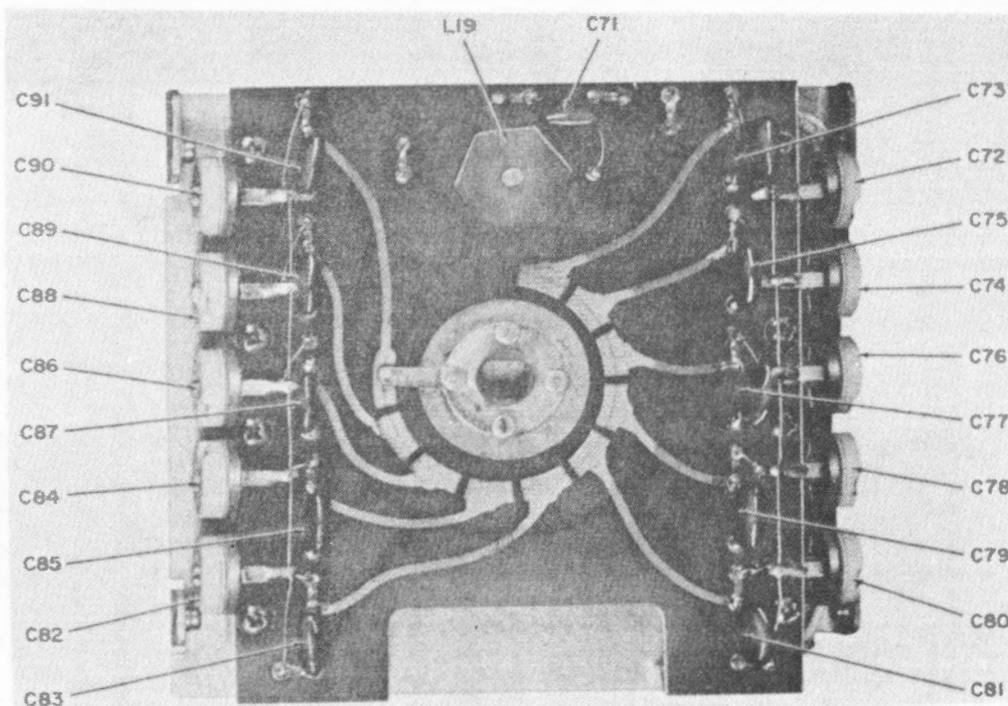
Oscillator Control C-4311/PRC-47 (A7), Card Assembly E5, Parts Location
